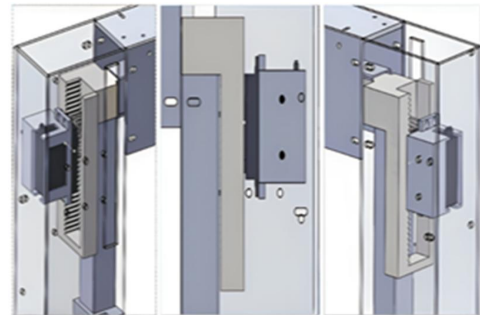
Rack and Pinion Gear Usage in Elevating the Upper Section.
